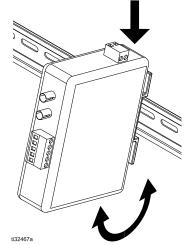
Mounting Fiber Optic Converter to DIN Rail
